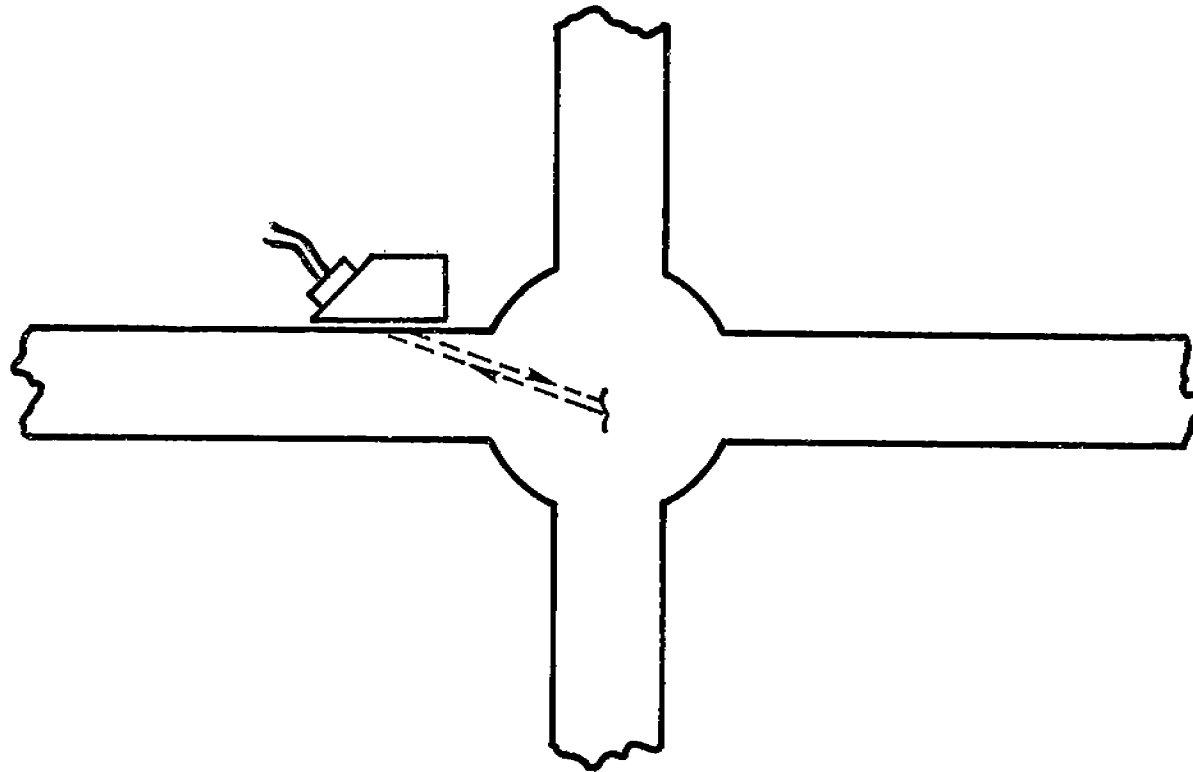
ULTRASONIC PROCEDURE FOR INSPECTING AN "X" JOINT WELD
